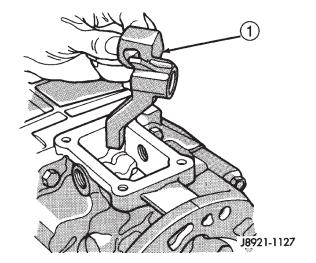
Position Shift Arm in Adapter or Extension Housing
